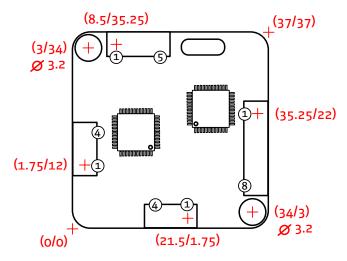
Board dimensions for hardware version up to V1.1, position of mounting holes, and position (pin 1) of connectors (all values in mm). Not to scale.
